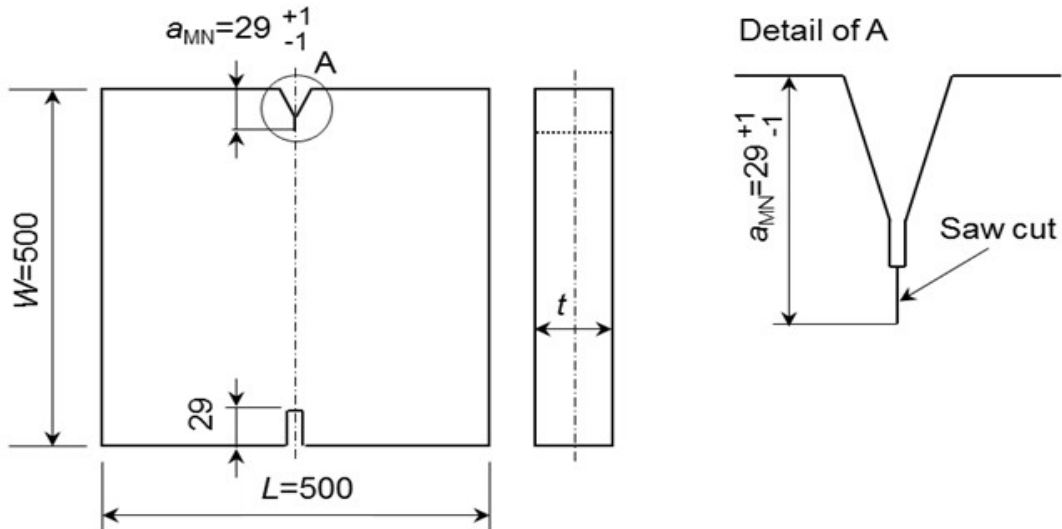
Test specimen dimensions for an impact type specimen
